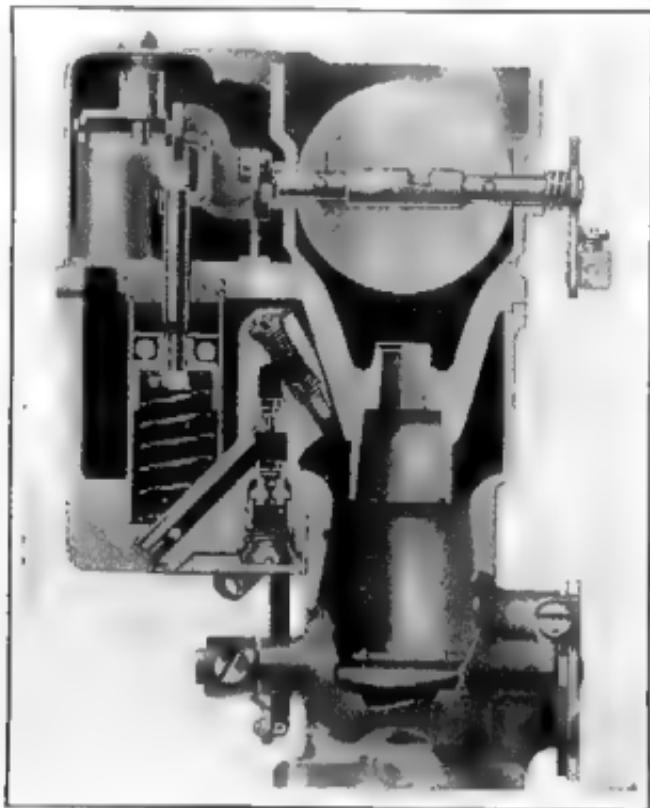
Carburetor Choke Valve and Accelerating Pump
